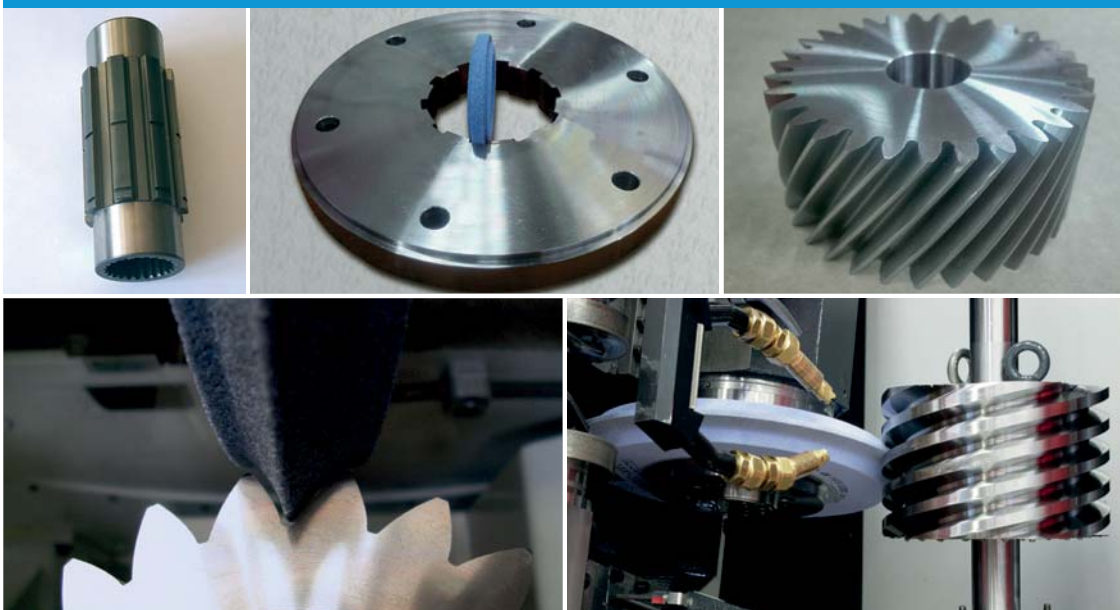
Splined shaft, splined hub, free profiles, asymmetric involutes, and cylindrical worm (top left to bottom right)
